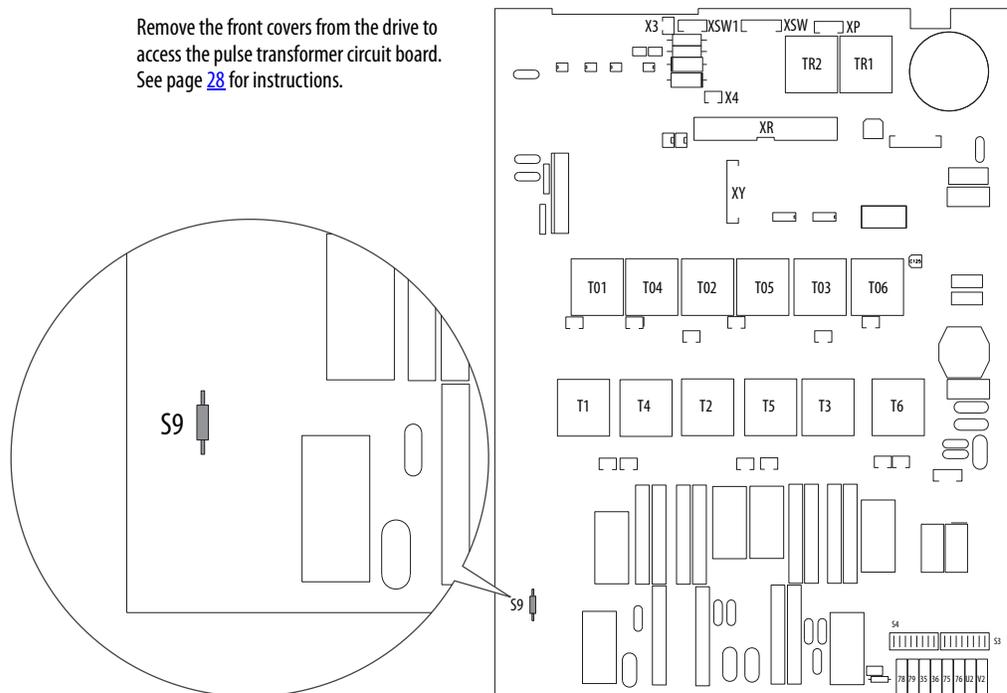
Frame B Pulse Transformer Circuit Board S9 Jumper Location
